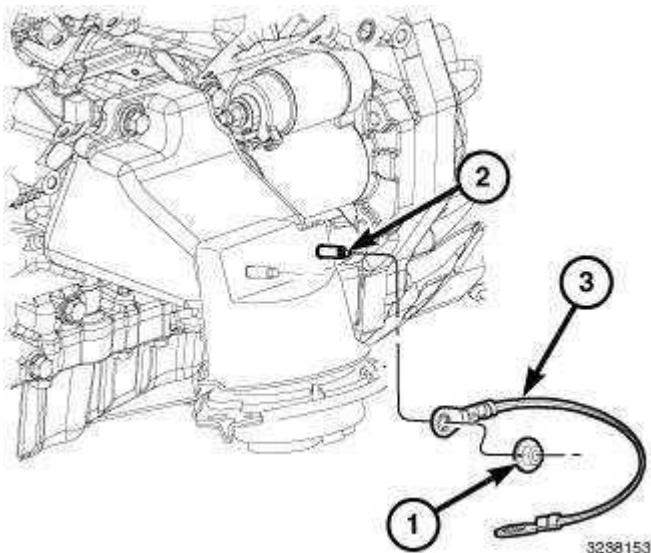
Suppression Retainer And Driver Side Engine Mount Stud
